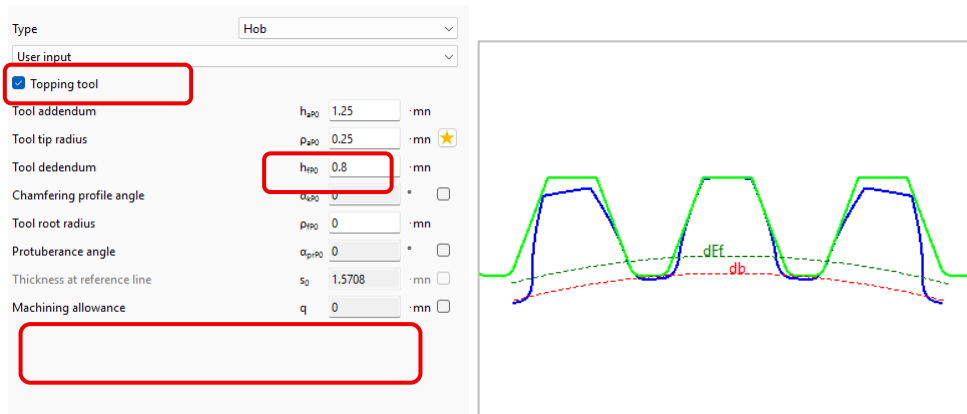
Addendum gear is not entered anymore. The gear addendum is now determined from the dedendum of the tool. Flag *Topping tool* enabled.
